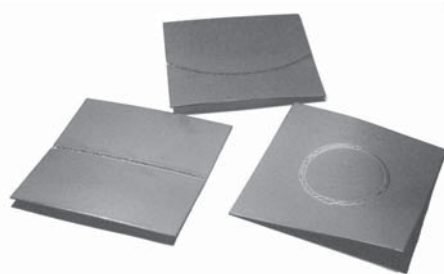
SAMPLES SHOWING THE WELDING-INDUCED DISTORTIONS
